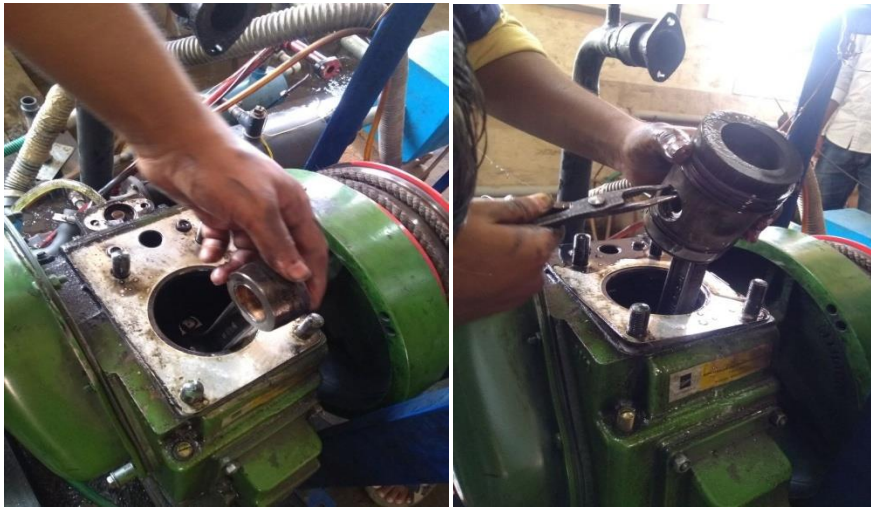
Installing Cylindrical Piston , (Hemispherical piston is removed and modified cylindrical piston fitted on to the connecting rod)
